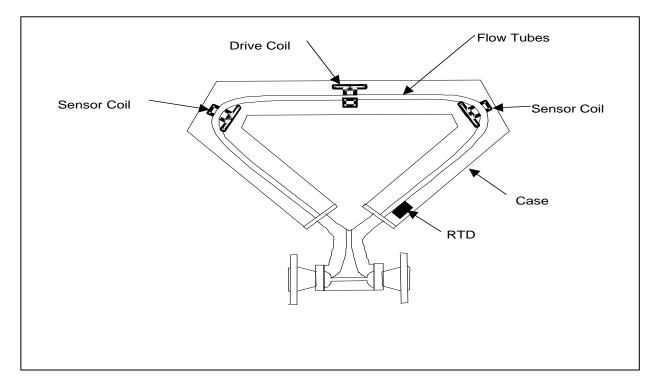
Key Components of a Bent tube - Bending Mode Configuration
